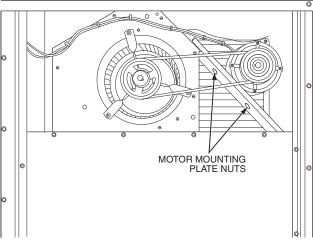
Typical Belt-Drive Motor Mounting for Sizes 090 and 102
